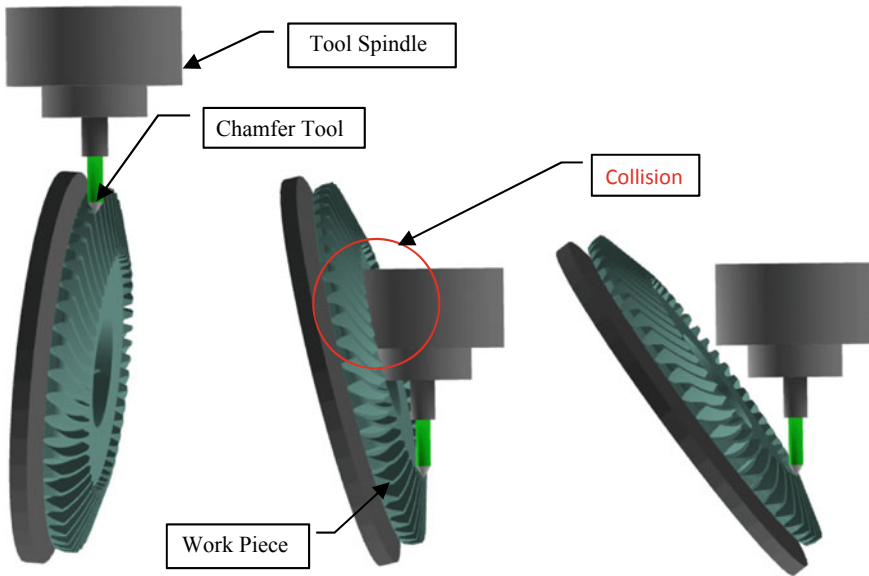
Chamfering Toe and Heel—Large pitch cone angle spiral bevel gear
